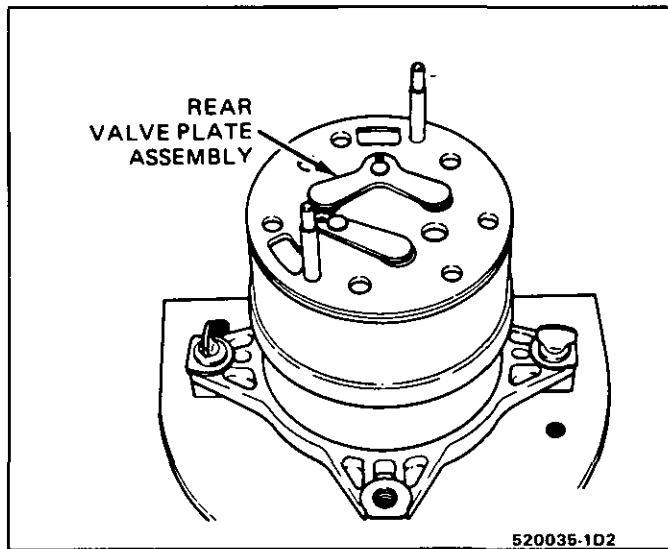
Rear Valve Plate Assembled To Cylinder Assembly
